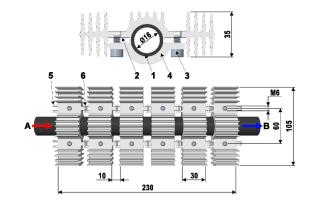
The basic dimensions and design of a demountable cooler. 1 – hydraulic pipe, 2 – upper finned flange, 3 – allen screw, 4 – lower flange, 5 – hinge, 6 – connecting pin, A – oil inlet, B – oil outlet.
